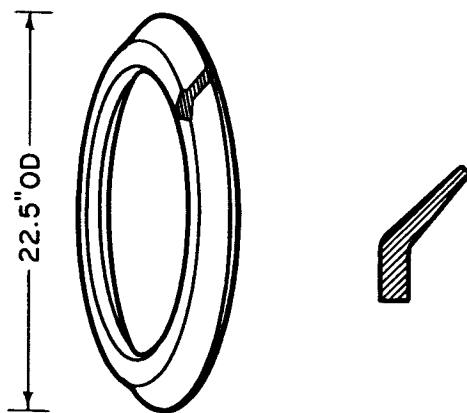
ILLUSTRATION OF A FLASH-WELDED L-605 JET-ENGINE RING (REF. 65).
